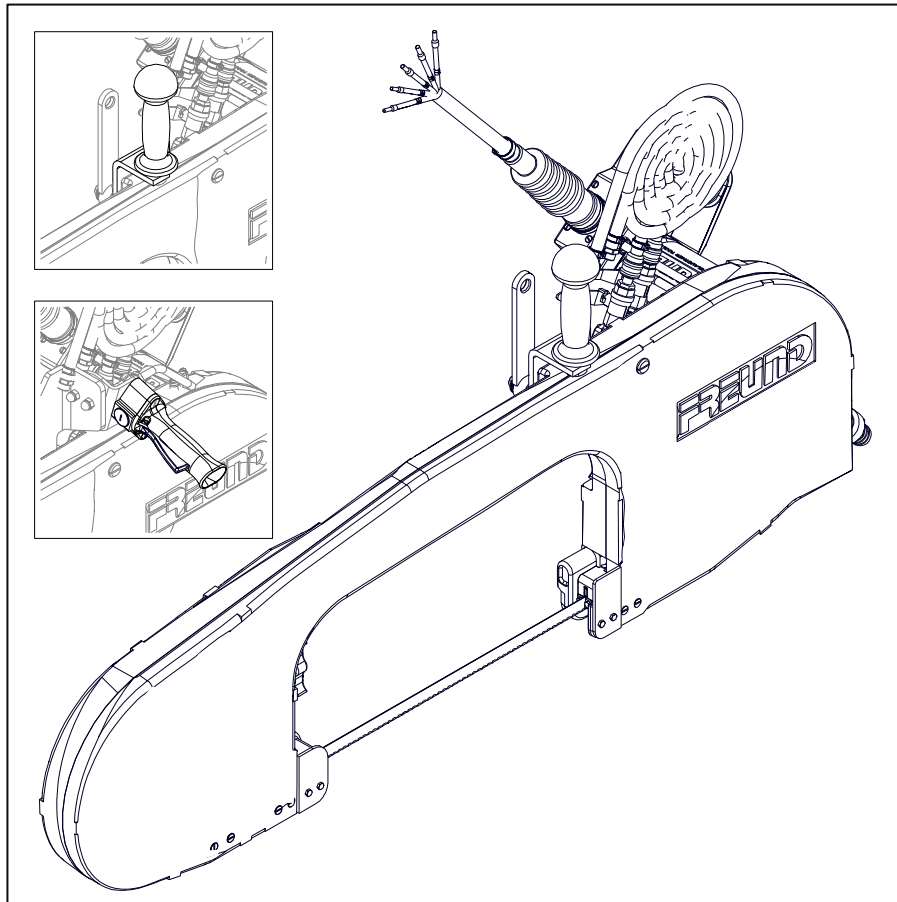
View of standard machine SB46-08 with detailed view of handle
